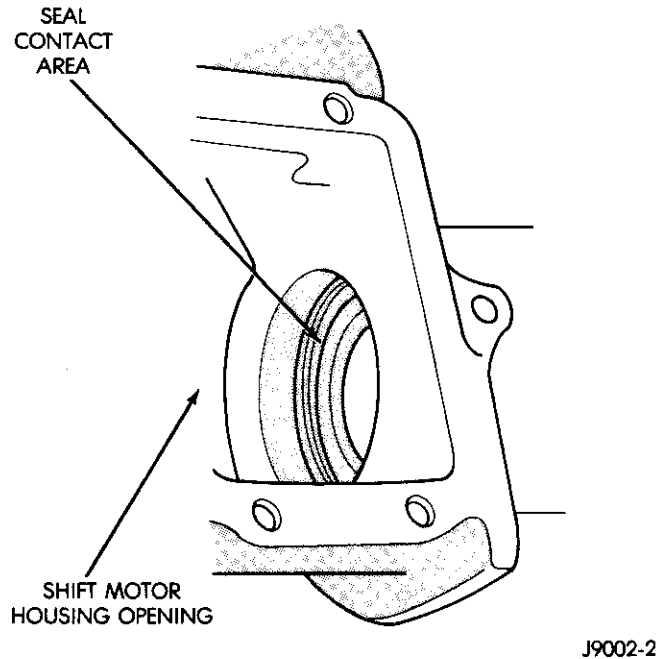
Axle Shaft Tube Bore Seal Contact Area
